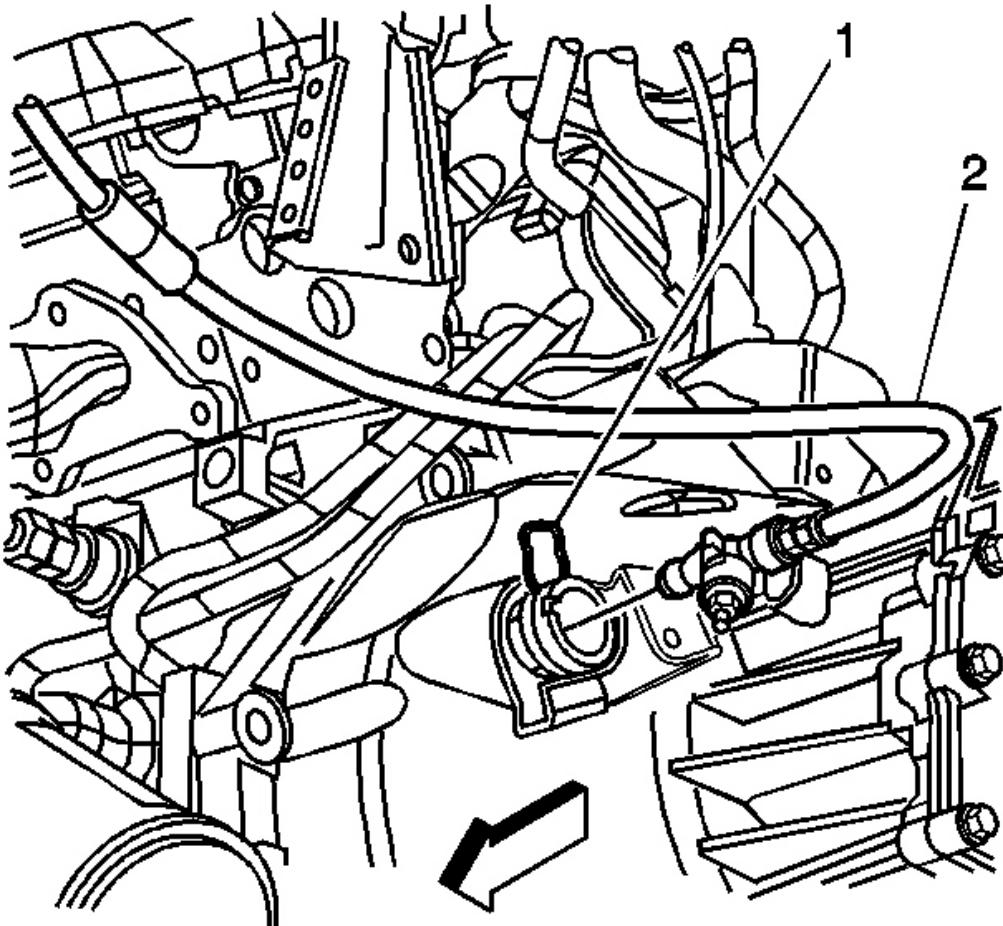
Identifying Clutch Retaining Hose Retaining Clip & Clutch Hydraulic Hose
